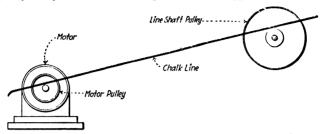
Side view; the line is bearing against edges of the lineshaft pulley
